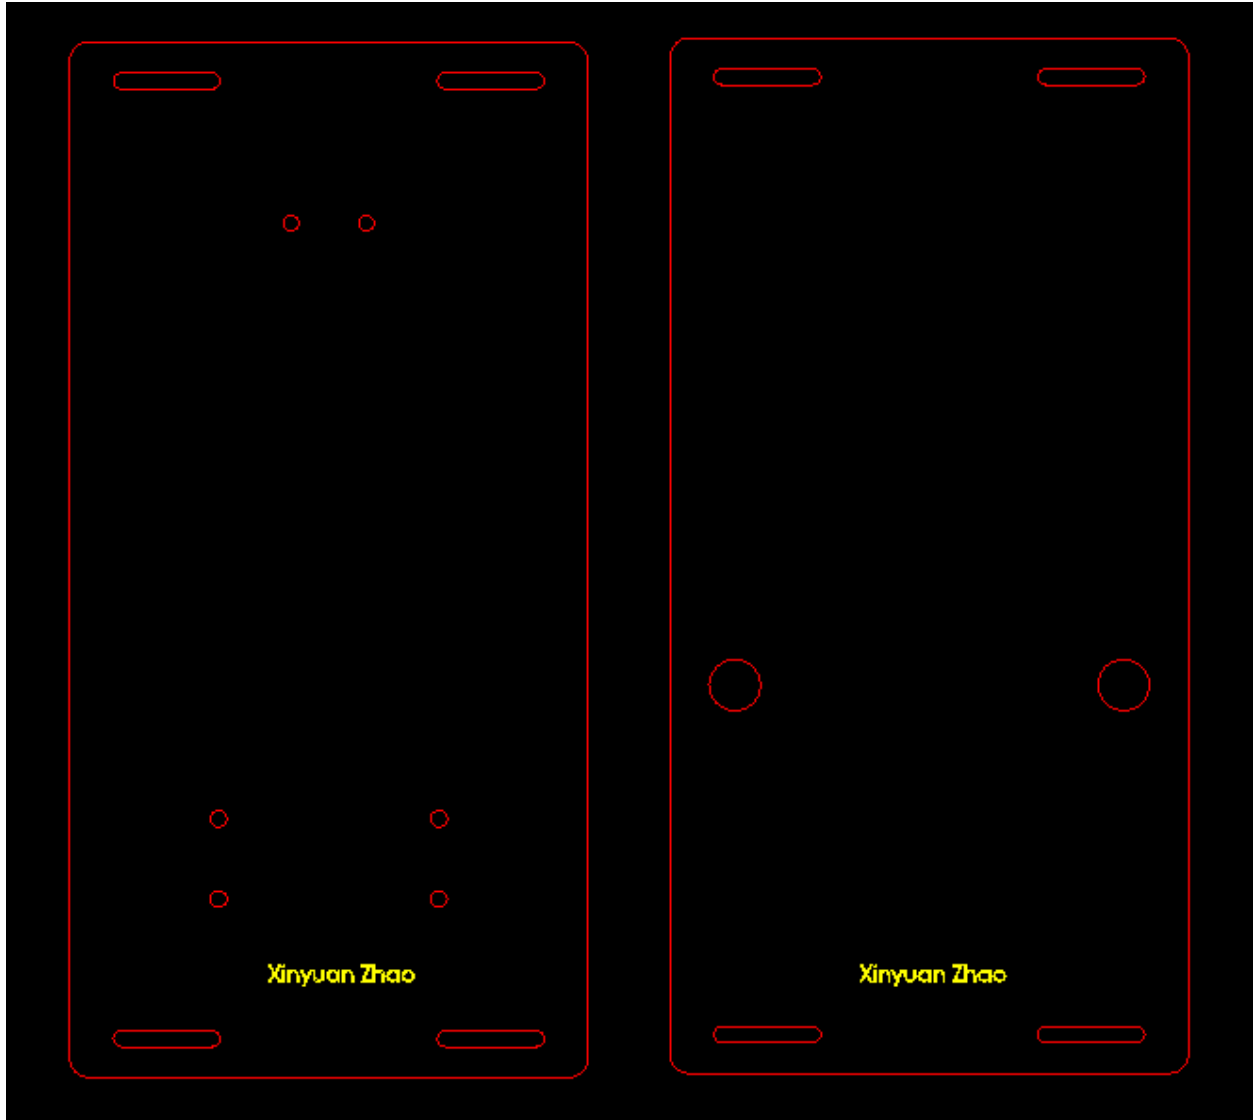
Left: Bottom Layer holding Motors and Wheels, Right: Top Layer holding Sensors and Battery
